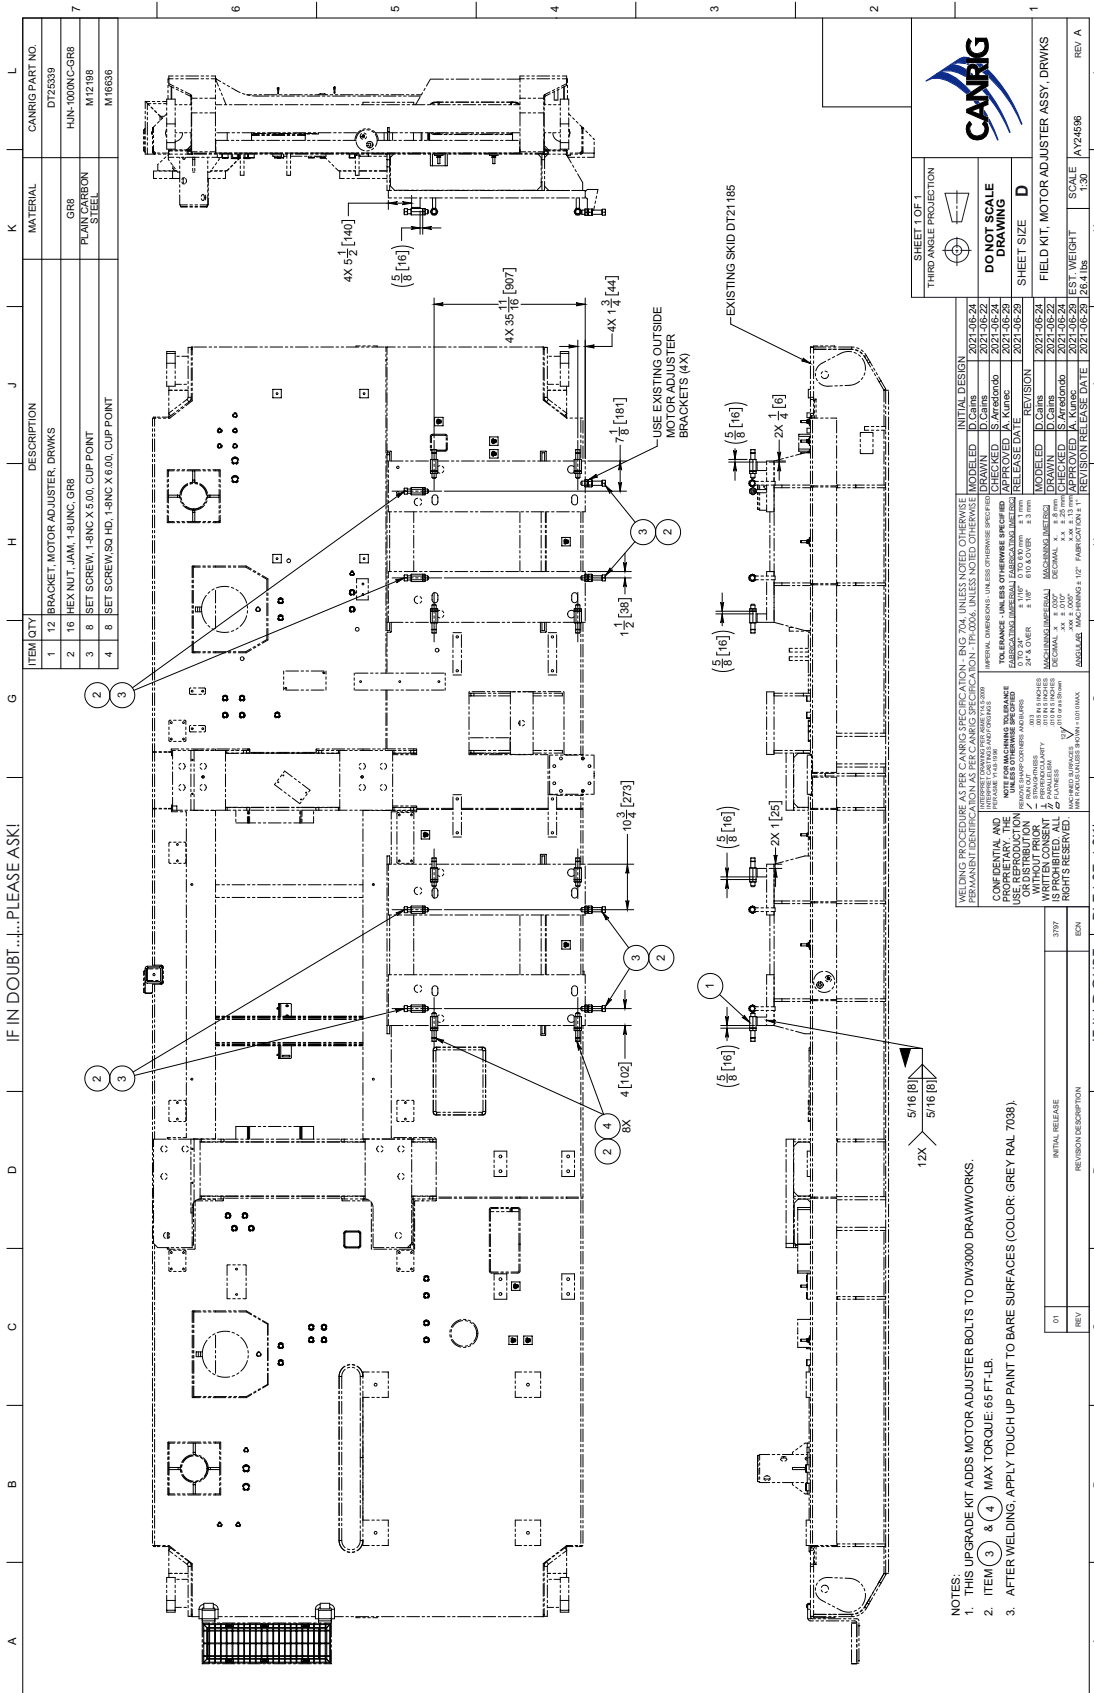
FIELD KIT, MOTOR ADJUSTER ASSY, DRWKS – AY24596
